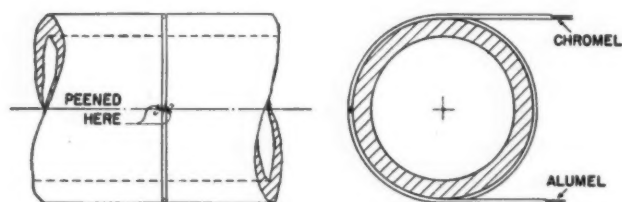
Glass-insulated wires in  $\frac{1}{32} \times \frac{1}{32}$ -in. groove in tube with hole in each side
